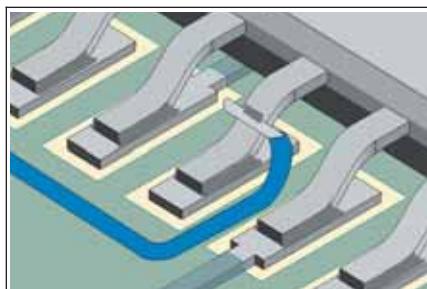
Acceptable Wire soldered to clipped component lead. +
